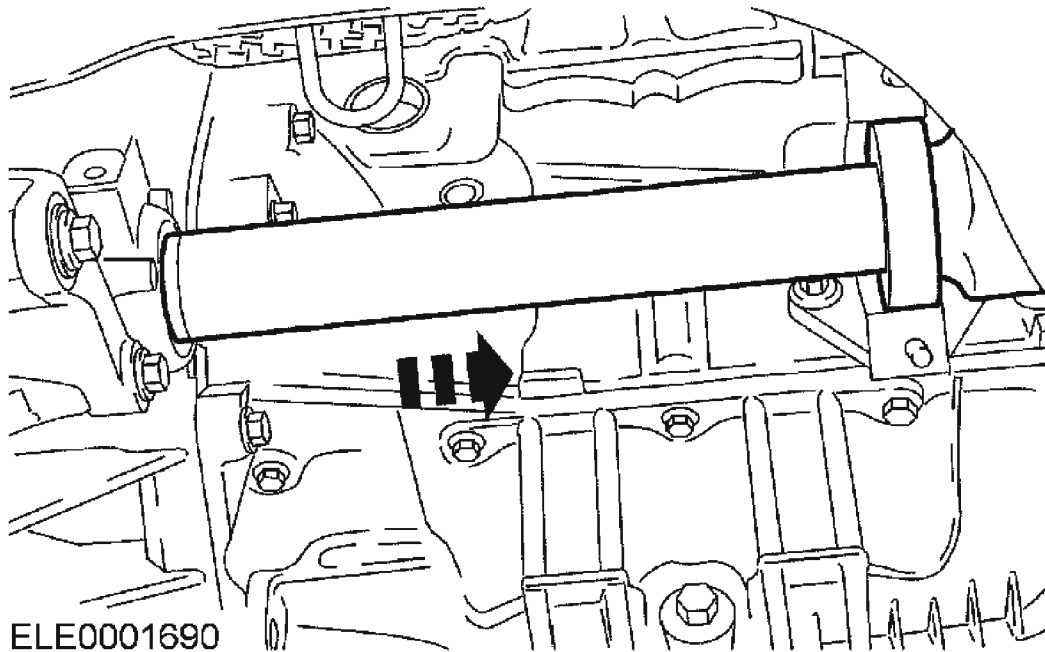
Detaching Halfshaft From Transaxle And Securing It To One Side
